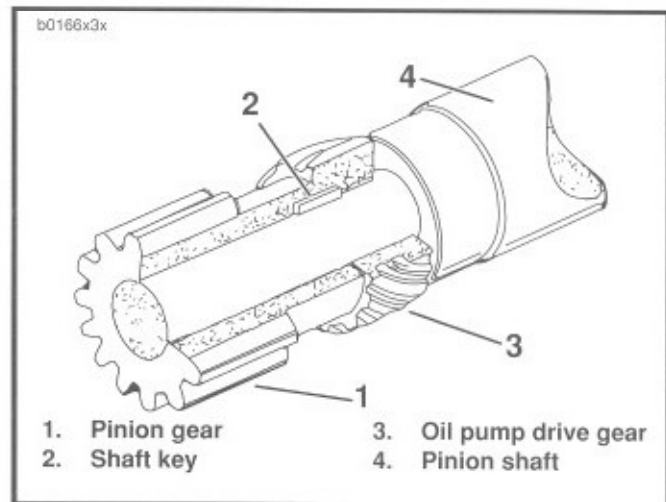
Oil Pump Drive Gear and Pinion Gear Installed on Pinion Shaft
